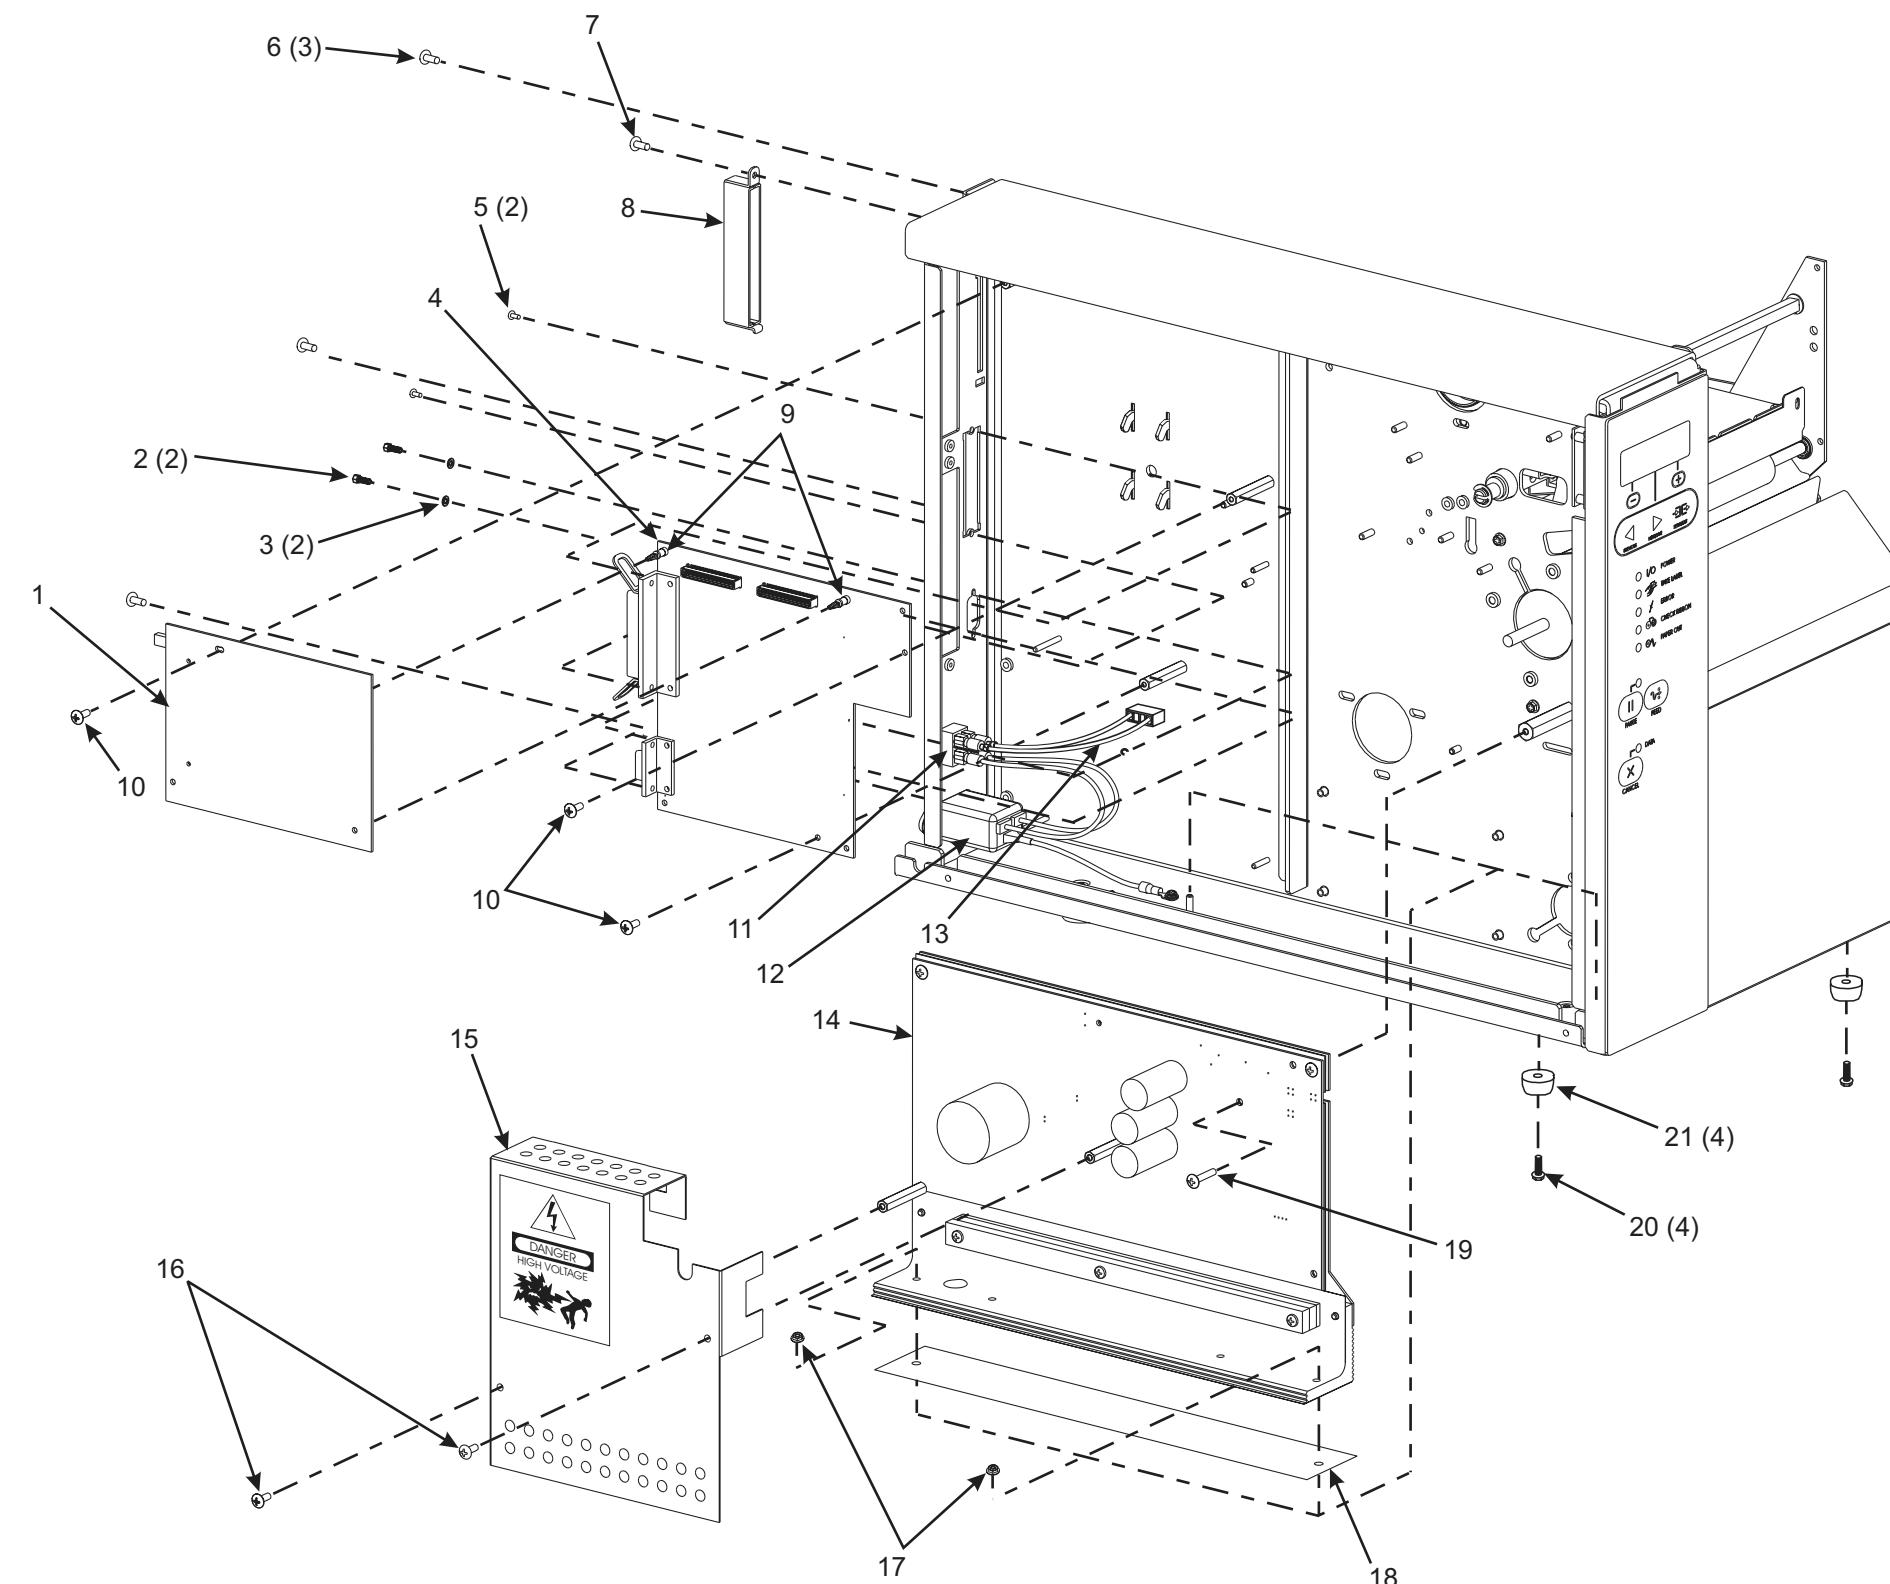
Final Assembly (View 4) for Configuration Numbers 10500-2XXX-XXXX and 10500-3XXX-XXXX
